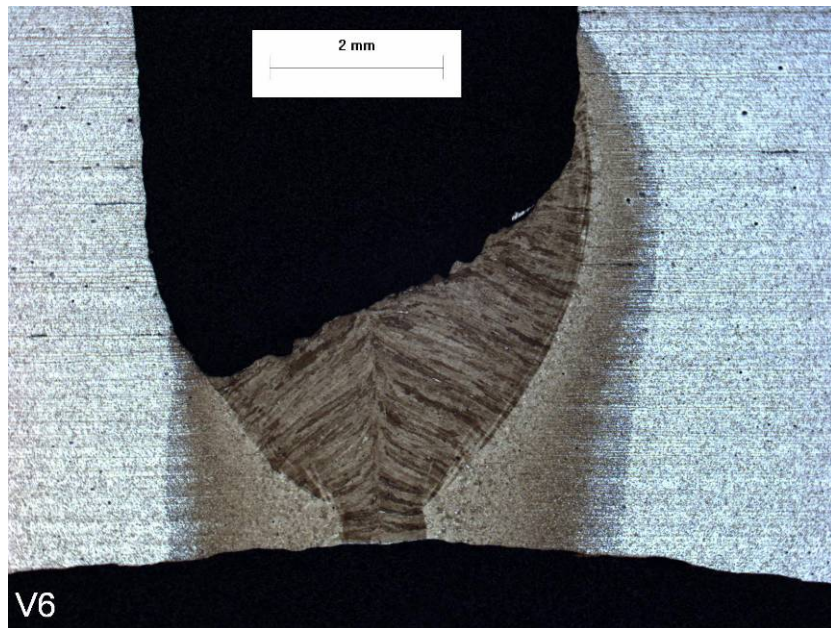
Macrosection of GMAW-VP Weld V6
